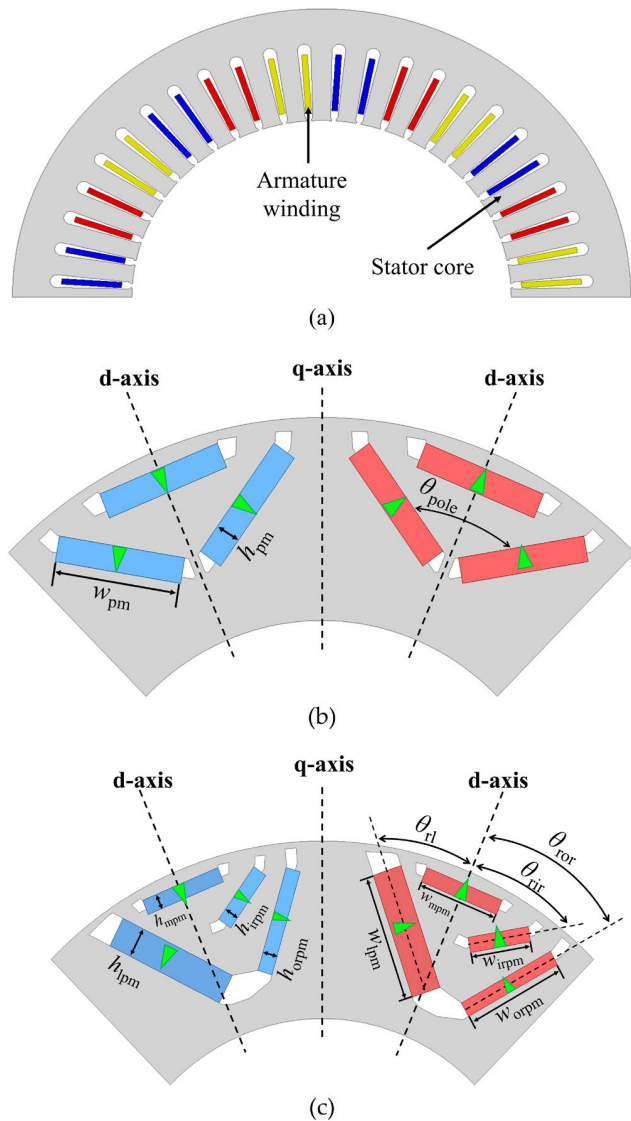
Cross-sectional perspective of topologies. (a) 48-slot stator. (b) The rotor of the ∇-shaped IPM benchmark motor. (c) The rotor of the proposed asymmetric hybrid-layer ∇-shaped IPM motor.
